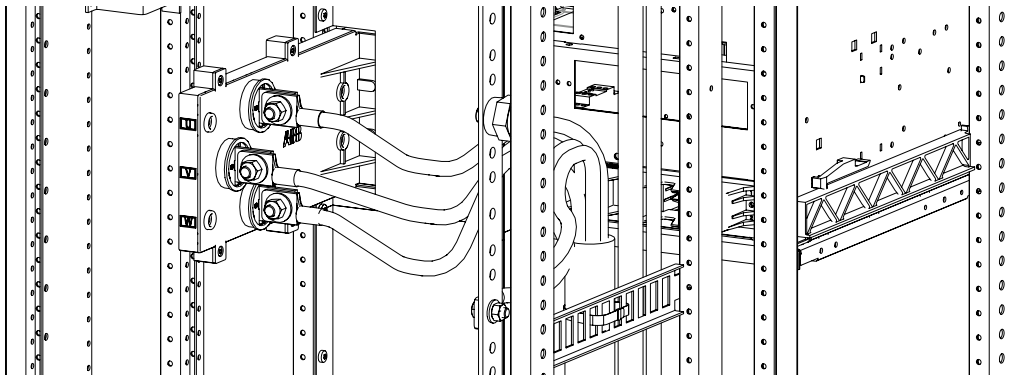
Example of MNS Rear cable runs, module size $\geq 4E$
